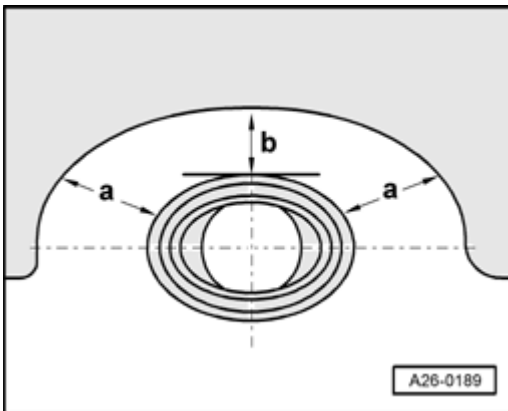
Checking Distance Of End Pipes At Left/Right To Bumper
